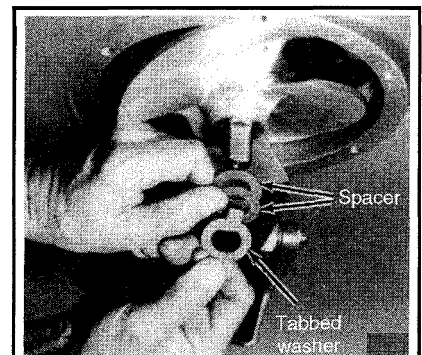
Impeller clearance is adjusted by moving shims (usually from below to above the impeller)
